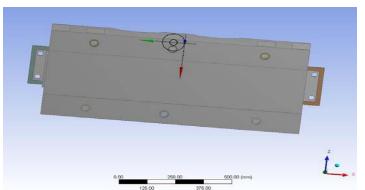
Bolt radius to support (bottom view of gearbox casing)
